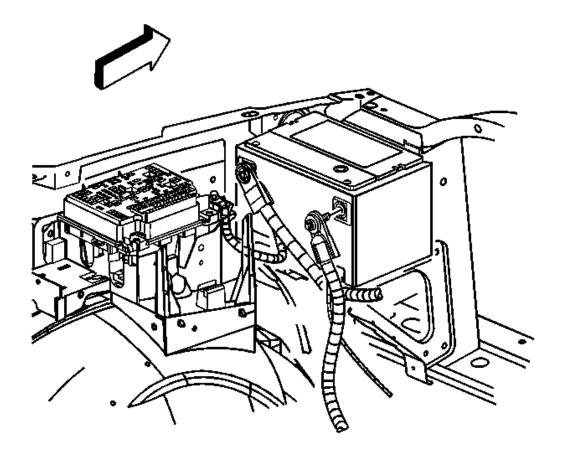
View Of Throttle Actuator Control (TAC) Module Electrical Connector Courtesy of GENERAL MOTORS CORP.
